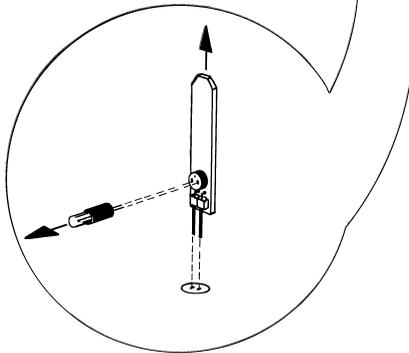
The sketch shows how the Tracklight bulb (6.3V /0.2A) should be removed from the connection socket.
